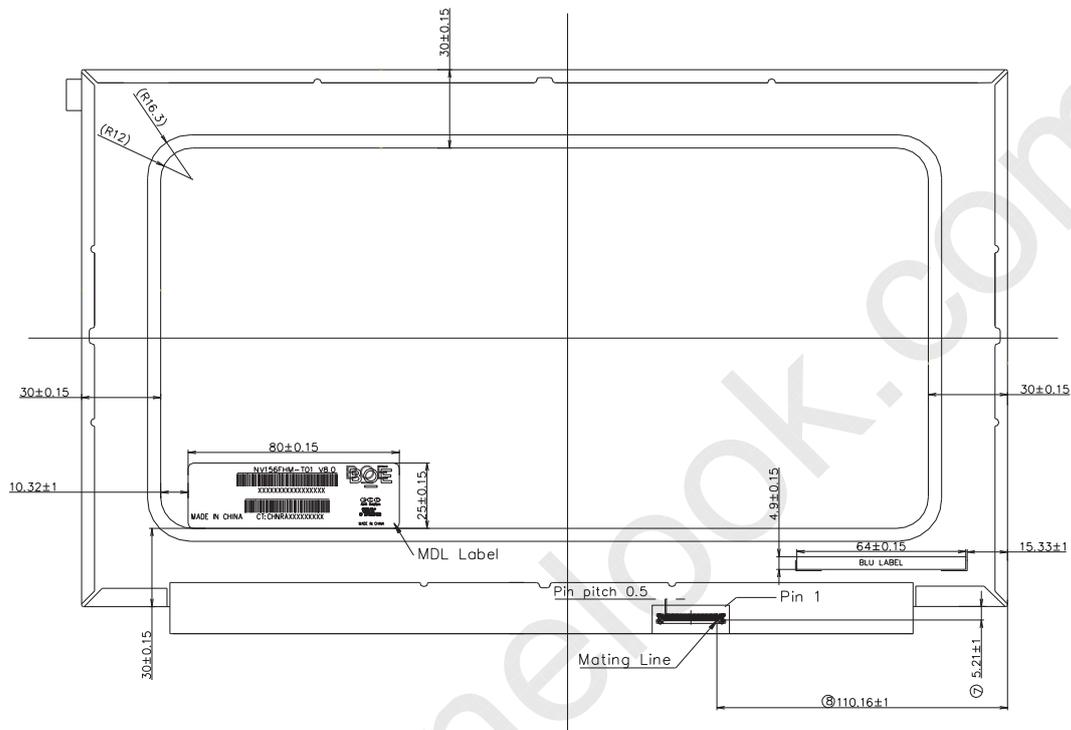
TFT-LCD Module Outline Dimensions (Rear view)
